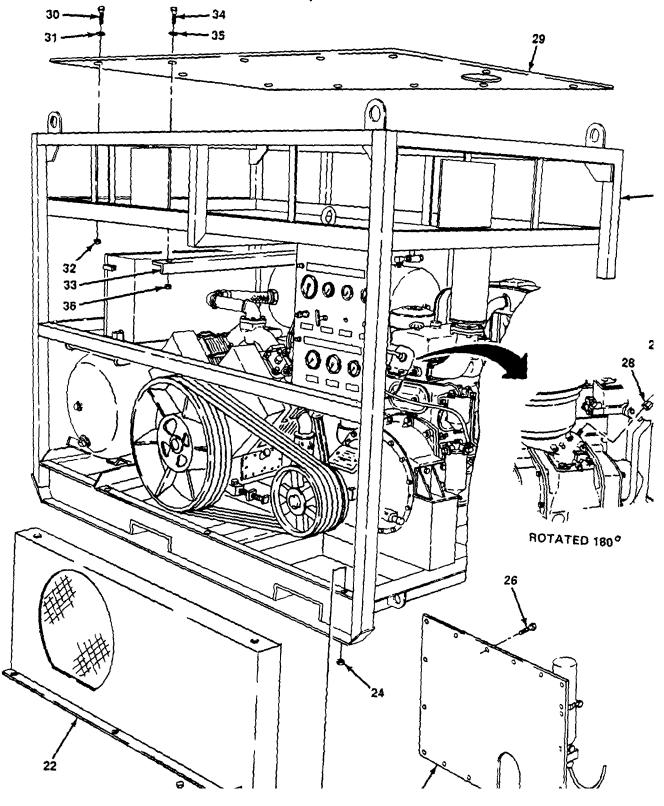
Air Compressor, Installation (Sheet 2 of 2).
